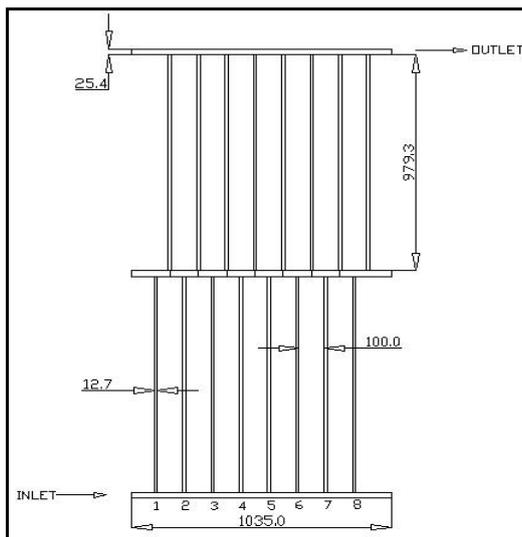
Sectional view of the Zig-Zag arrangement of riser tubes.
